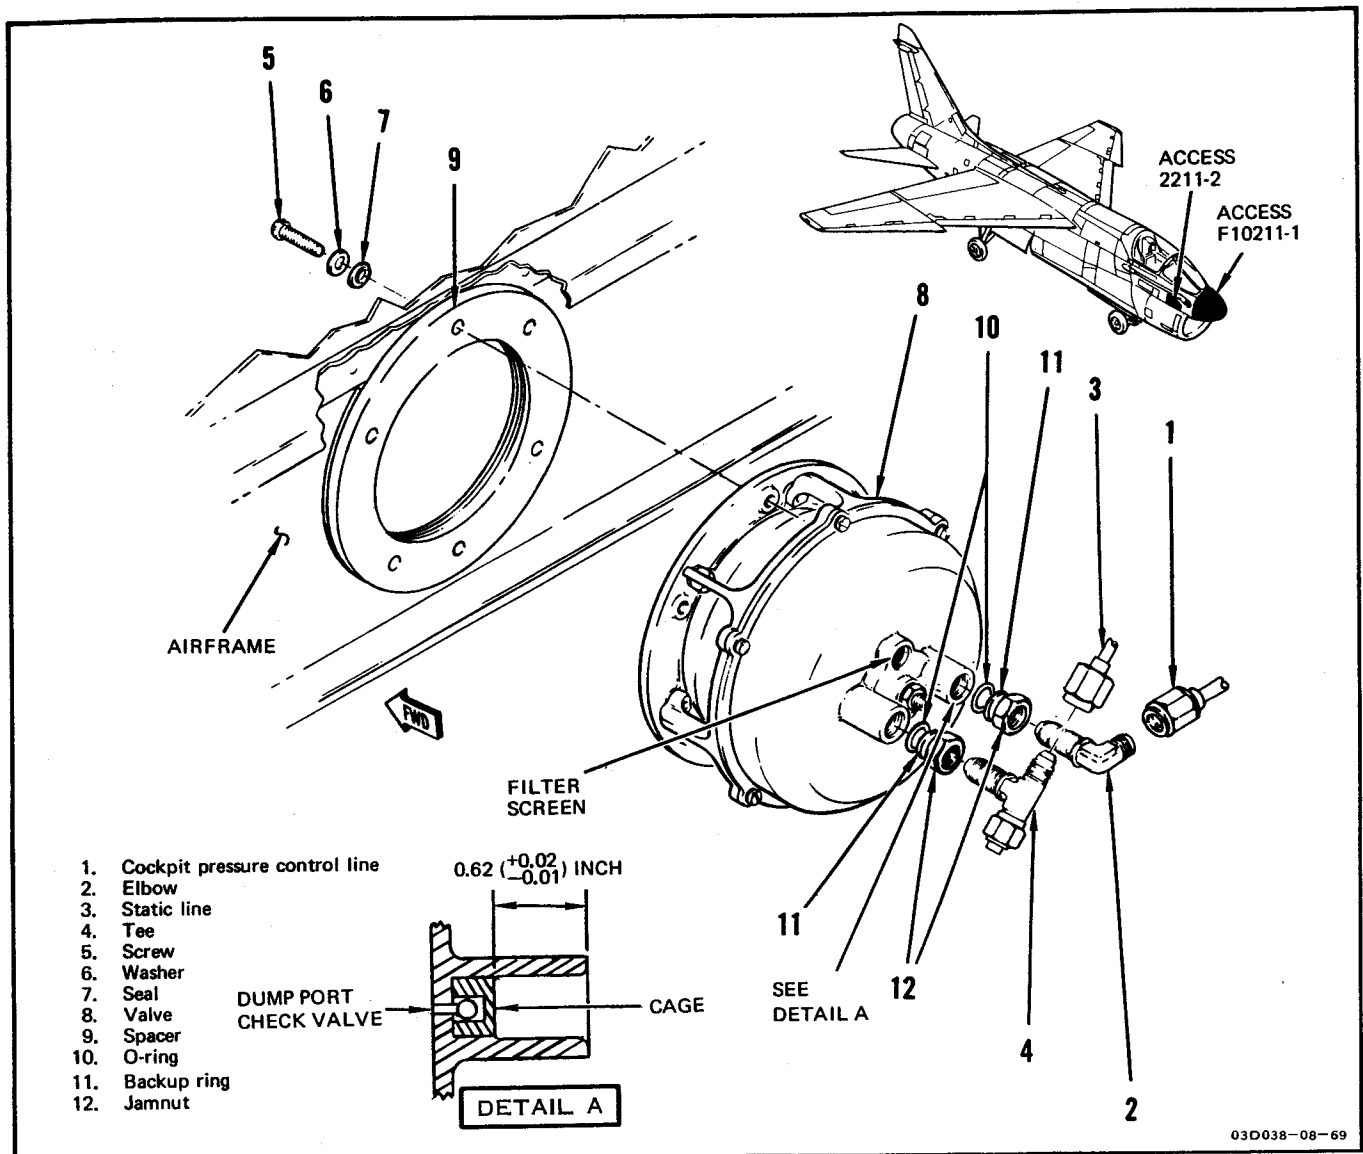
Cockpit Air Safety Valve Removal and Installation
